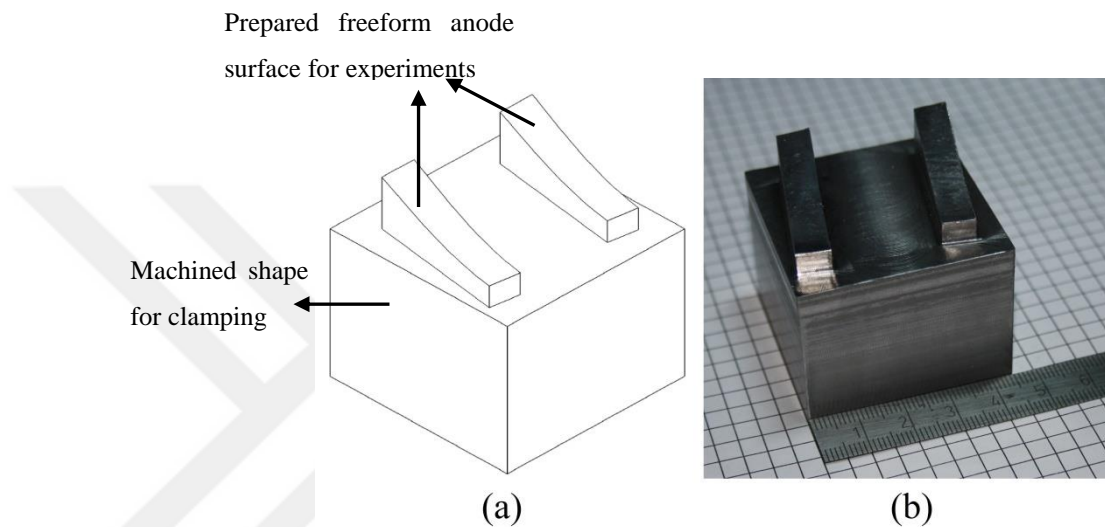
Drawing (a) and photographic view (b) of the anode
